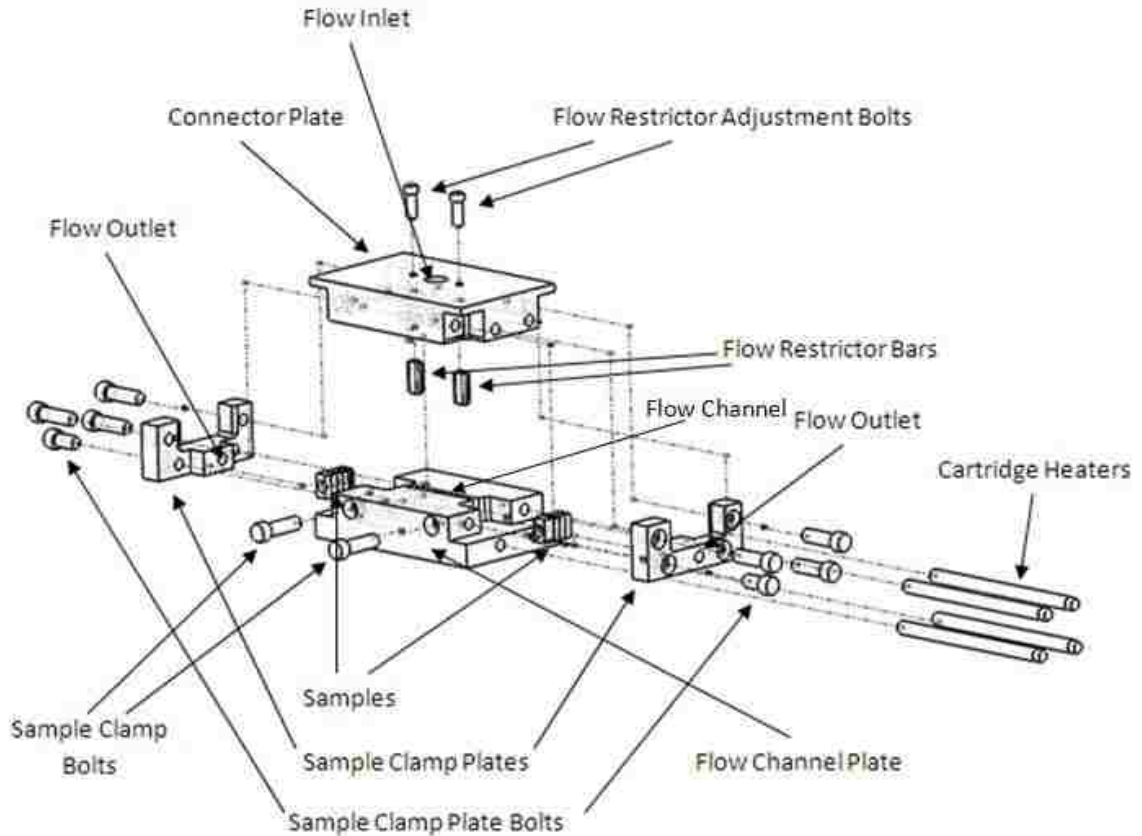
Exploded Assembly View of Concept Melt Wear Test Extrusion Die
